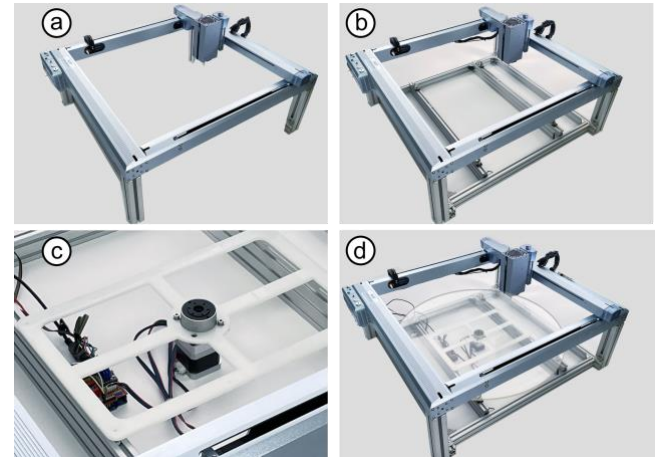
(a) Starting with an off-the-shelf laser cutter [16], we add yaw by (b) extending the frame with a mount, (c) adding a stepper motor and non-slack gearbox, and (d) adding the round table
